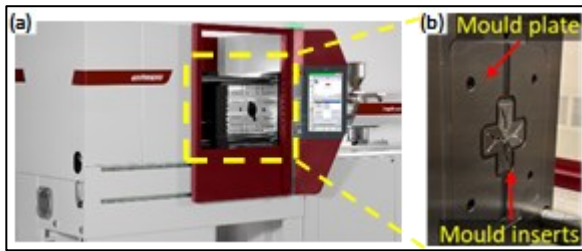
(a) Wittmann® Smartpower 50 machine and (b) mould inserts.
